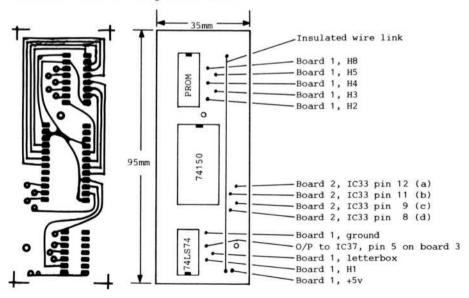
PC BOARD PRINT PATTERN AND COMPONENT LAYOUT
